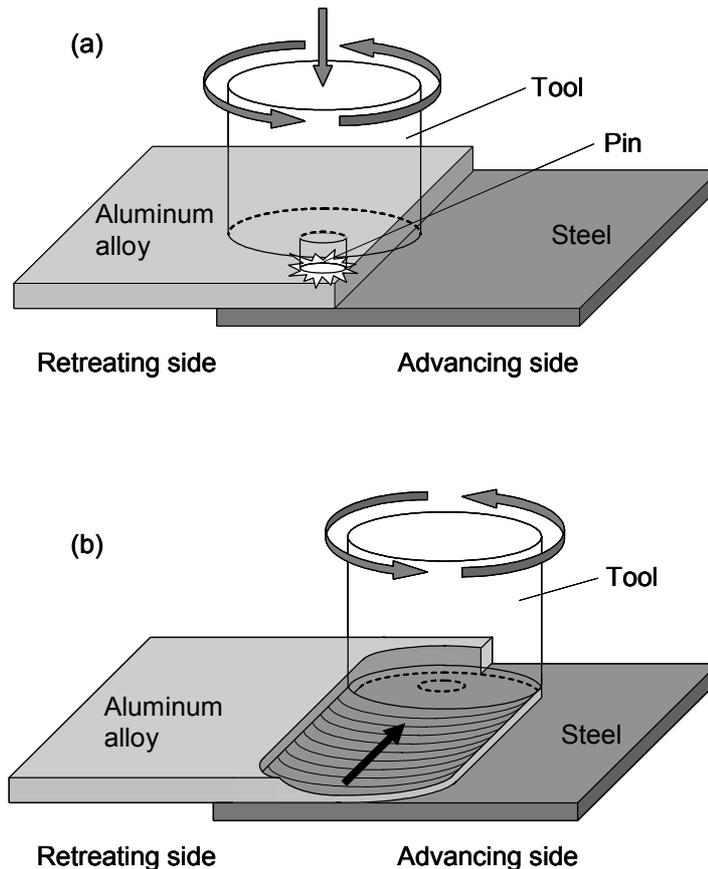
Friction stir welding process of steel / 6022 aluminum alloy joint. (a) A rotating tool is plunged into a aluminum alloy plate and (b) The tool is moved along the steel / aluminum interface.
